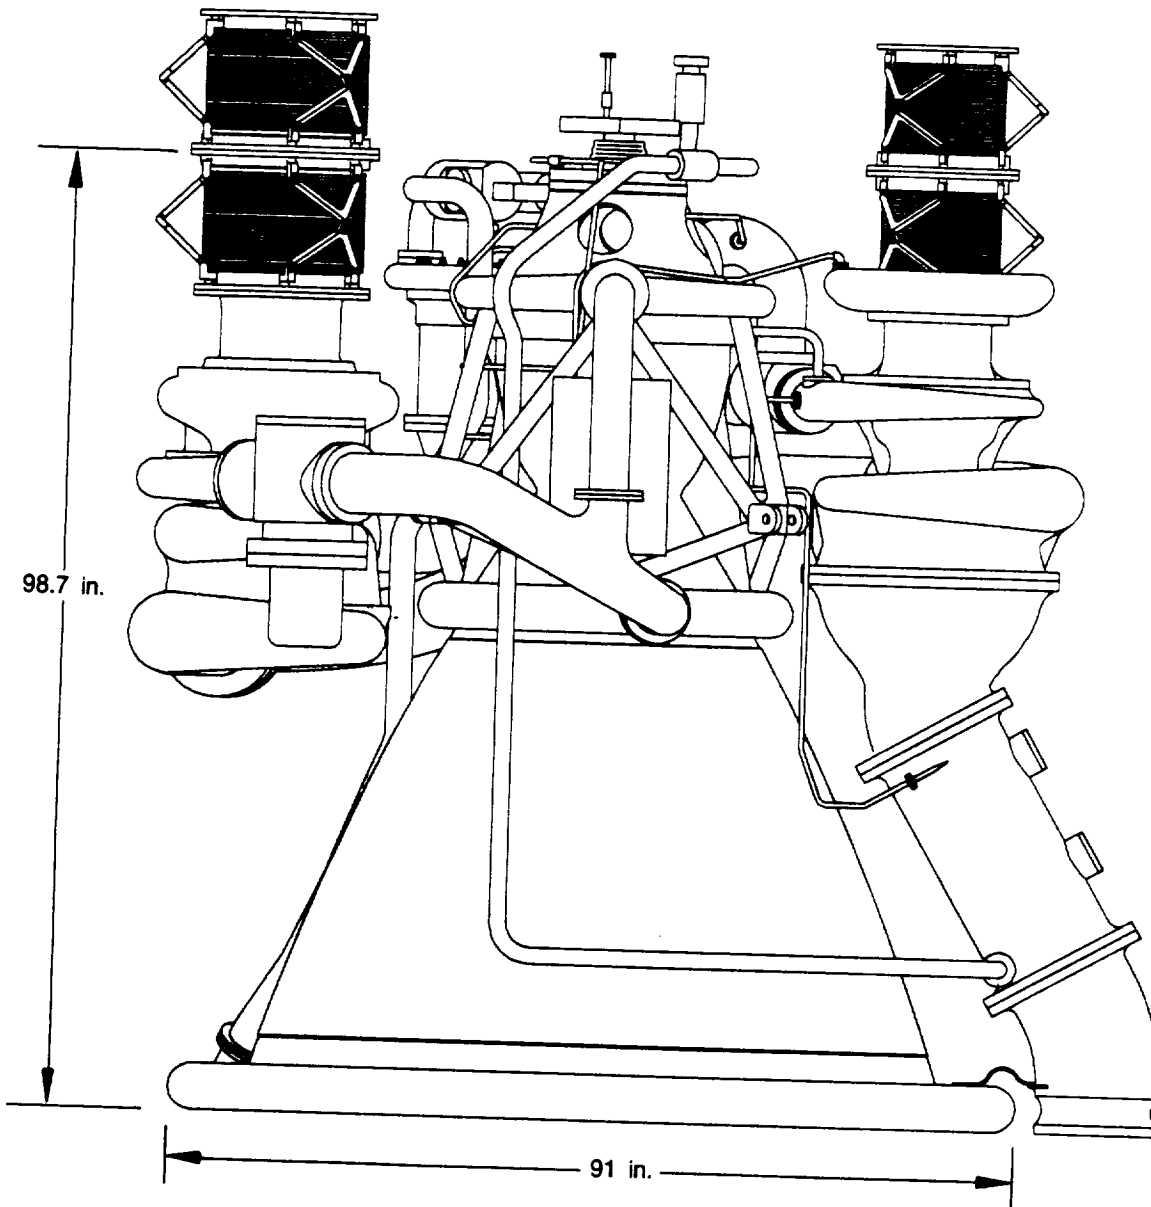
STBE Layout Drawing (Sheet 1 of 3)
